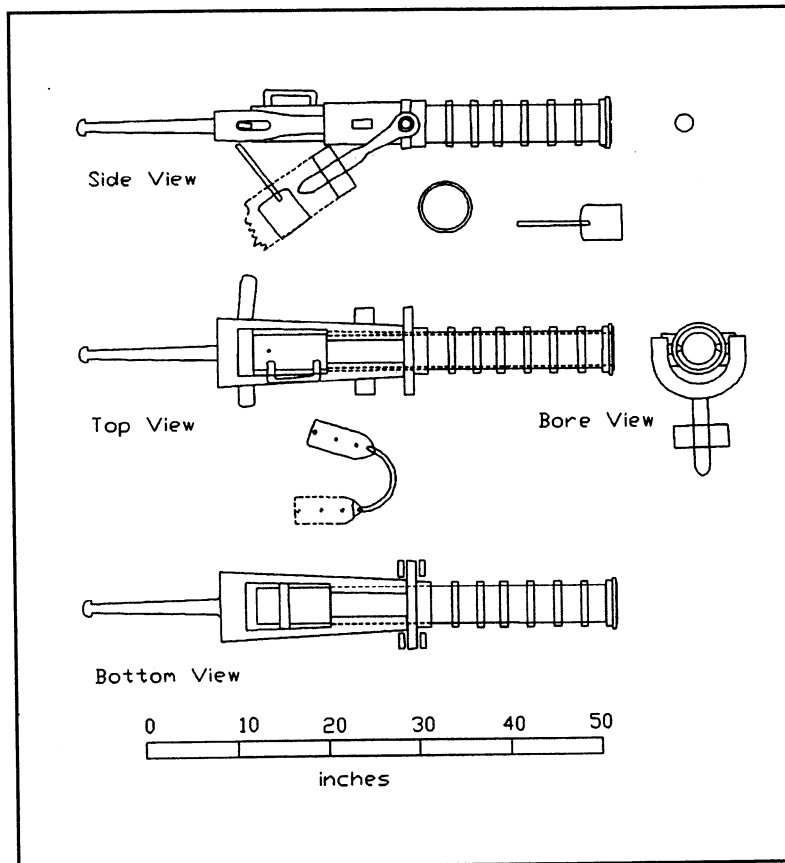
The swivel gun recovered from the wreck of *La Belle*. Drawing by D. L. Hamilton.
